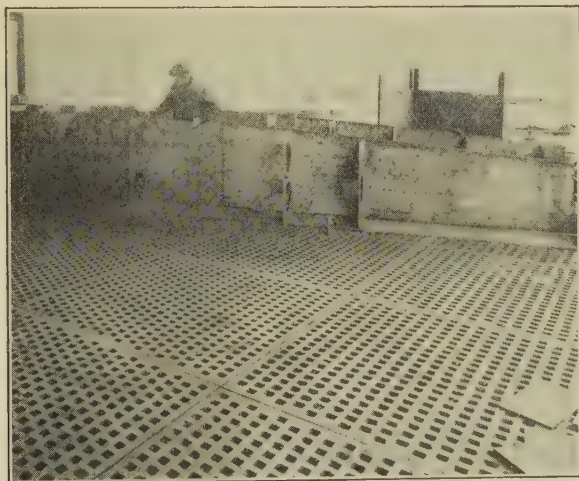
Welding slab, showing crane girder (Fig. 14) dogged down for welding.
